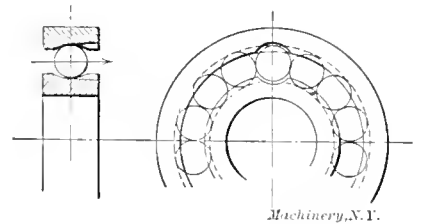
Objectionable Filling Groove in Ball Bearing.
